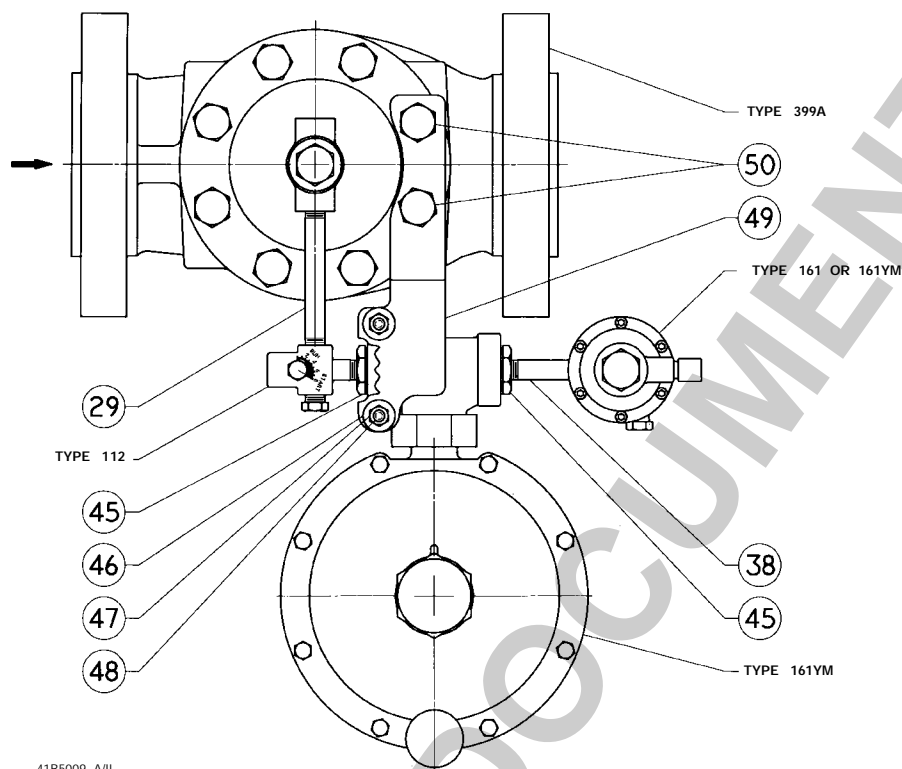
Pounds to Inches Working Monitor Mounting Parts
